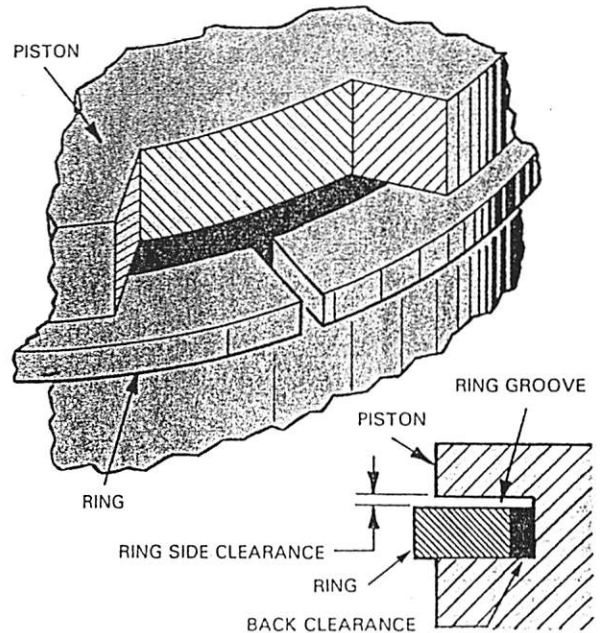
Compression ring-to-groove fit. Note that ring has both side and back clearance. Side clearance is actually quite small, running around .0015 to .002 in. (0.04 to 0.05 mm).
